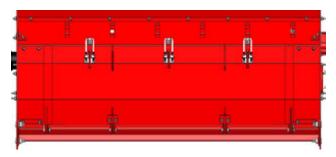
Close the flail drum door (Guard rods not shown for clarity)
